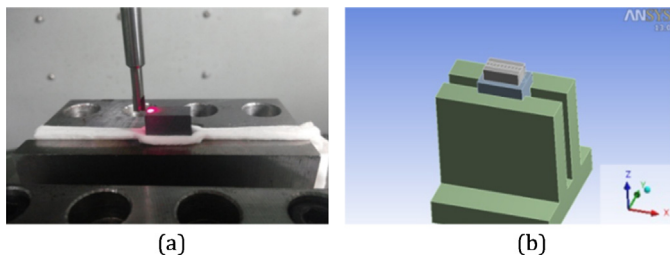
(a) Set up of the workpiece enclosed by an insulating material and (b) the workpiece model.
